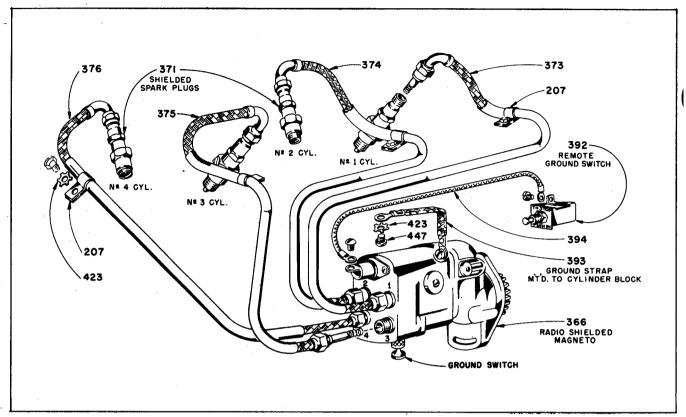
, RADIO SHIELDED MAGNETO IGNITION FOR MIL-E-11275-C ENGINES
